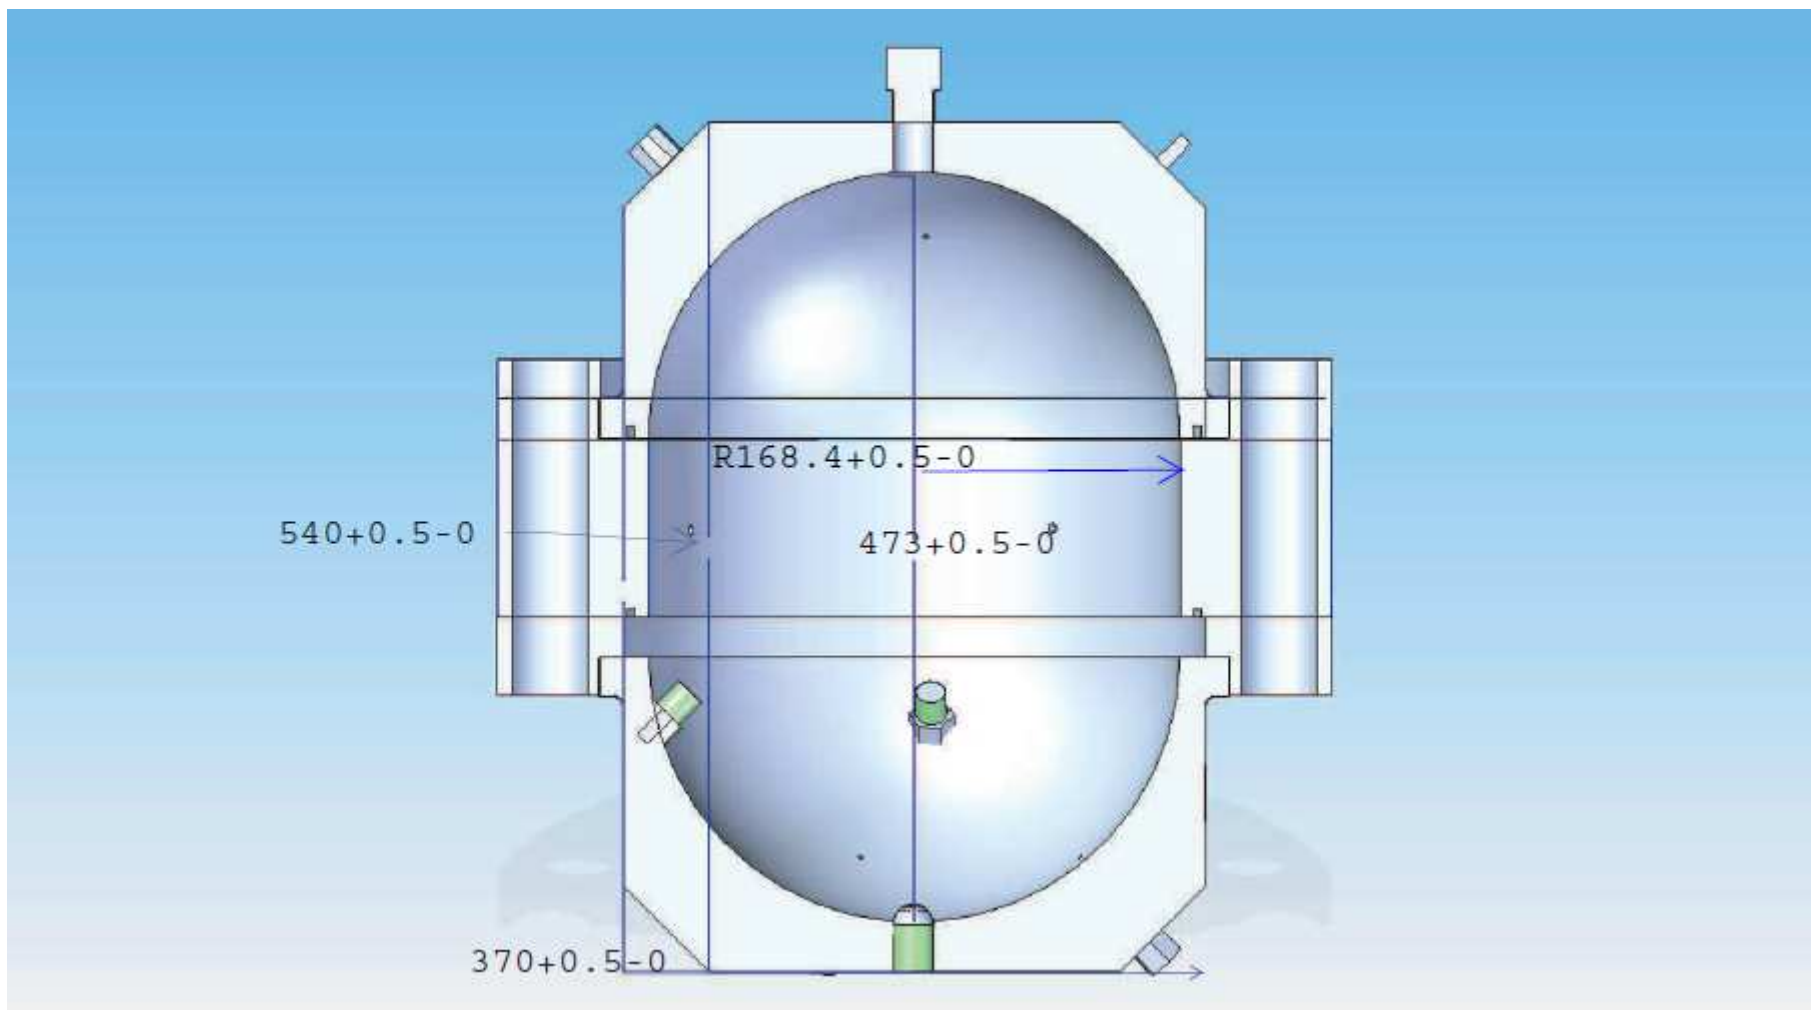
Cross-section of R-30 ignition chamber with key dimensions
